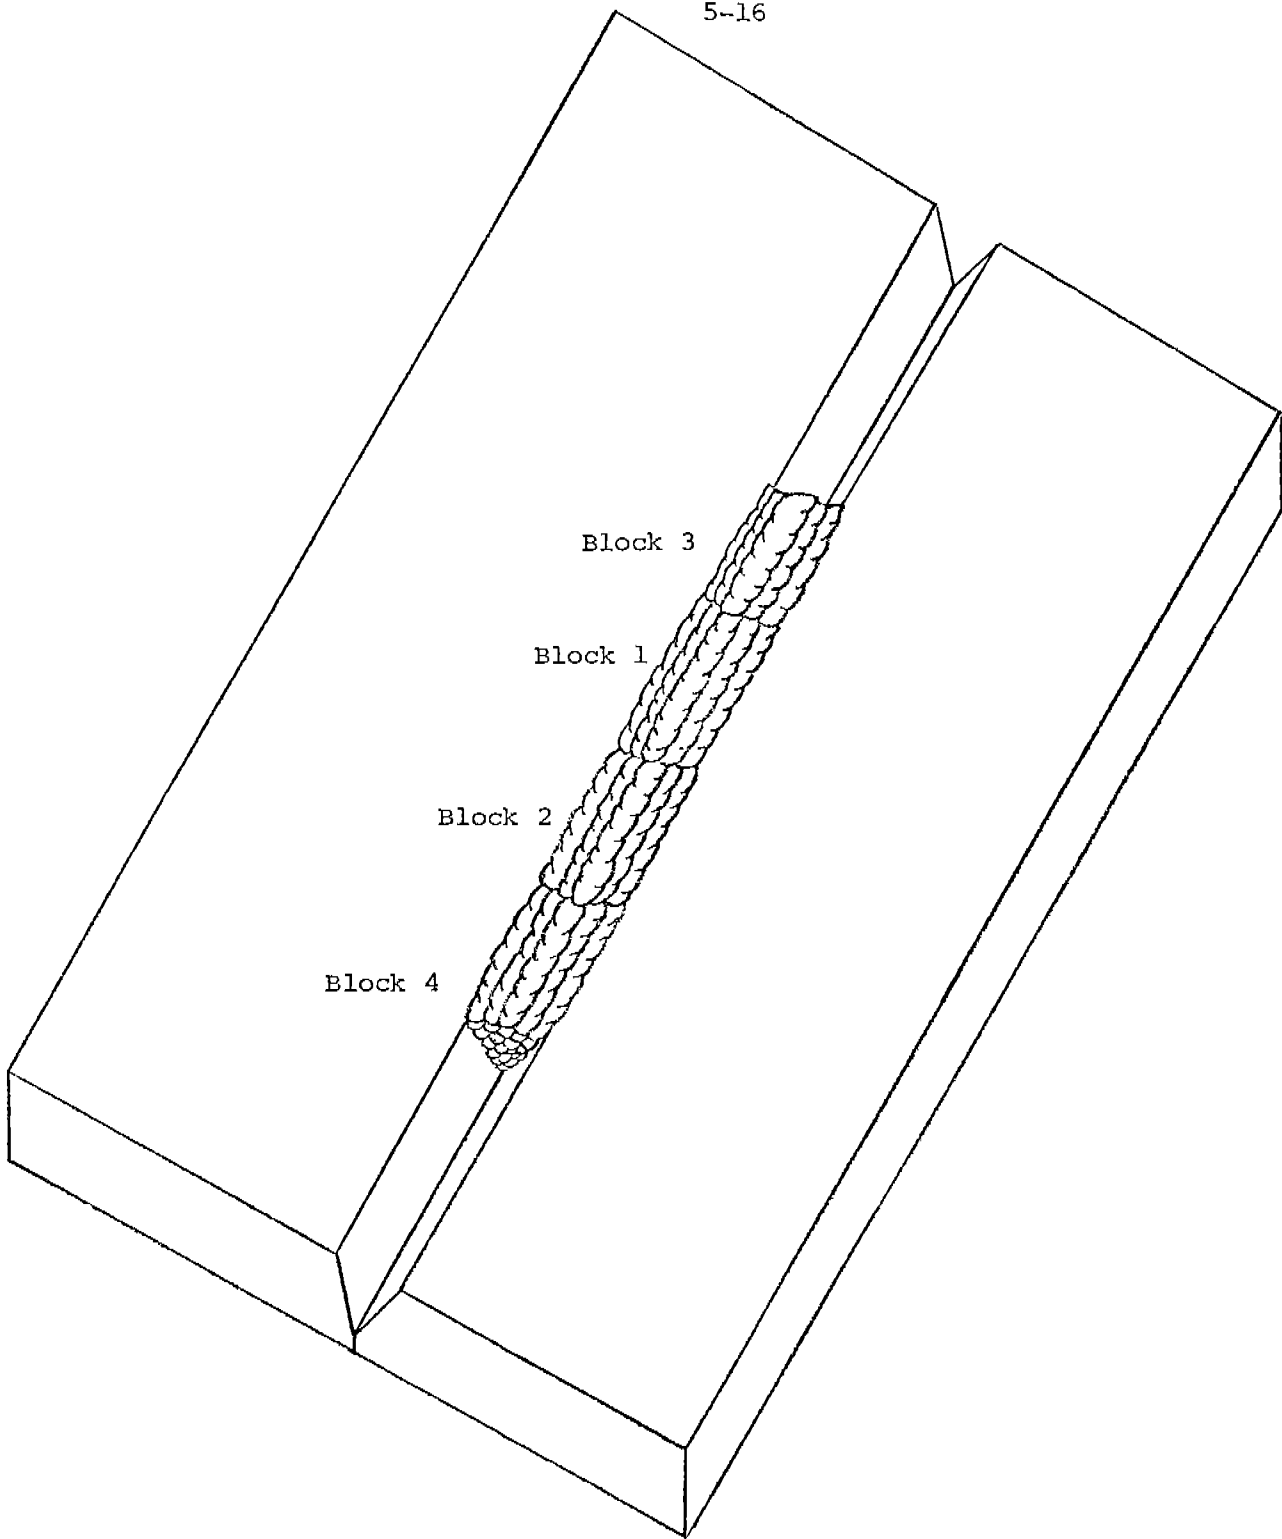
BLOCK WELDING TECHNIQUE
